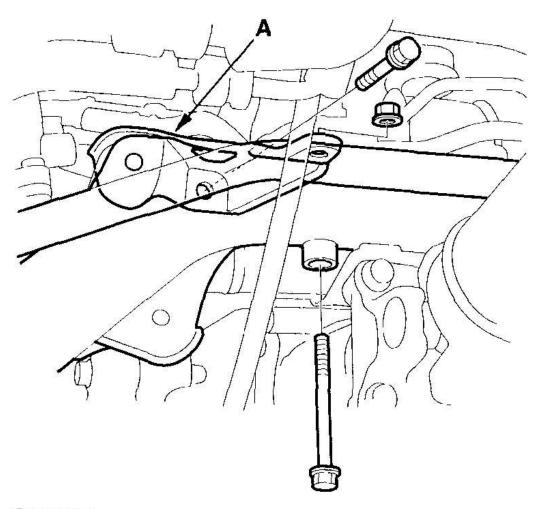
Identifying Front Suspension Subframe Dropping Dimension Courtesy of AMERICAN HONDA MOTOR CO., INC.
